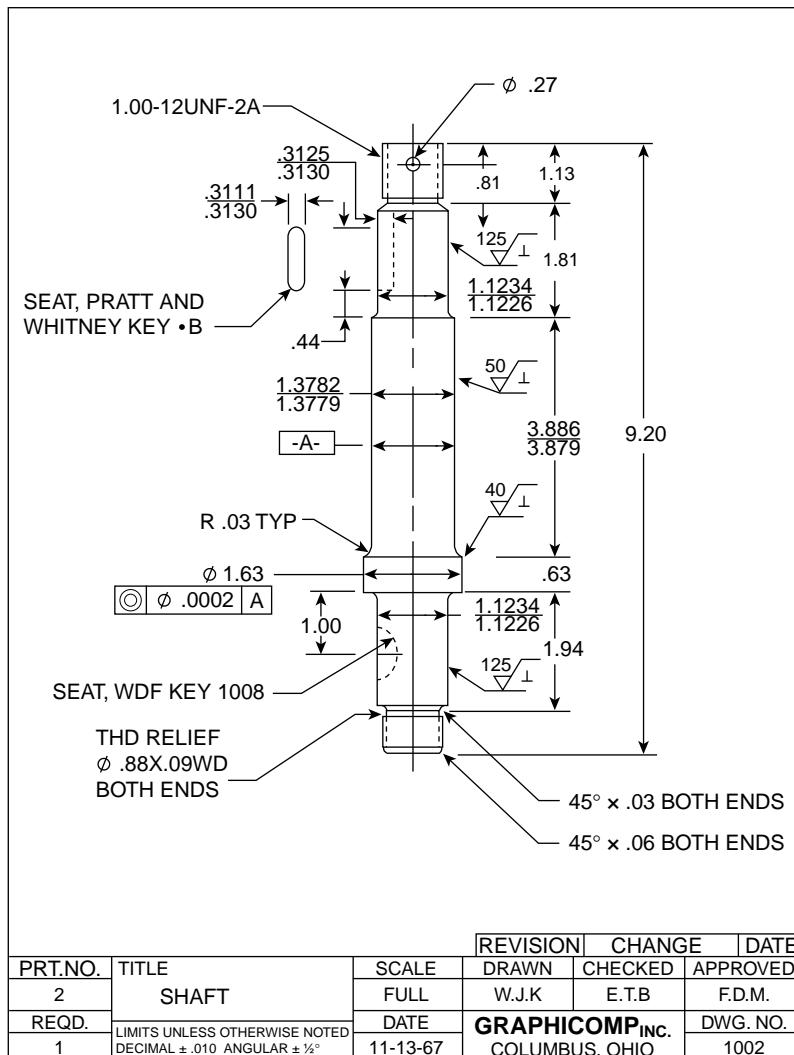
A detail drawing that includes tolerances and that indicates materials and lists special processing requirements. It was drawn in conformance with ANSI drawing standards. Adapted from Boyer et al. (1991).
